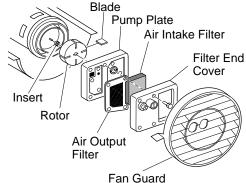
Rotor Location 115,000 Btu/Hr Model Shown
